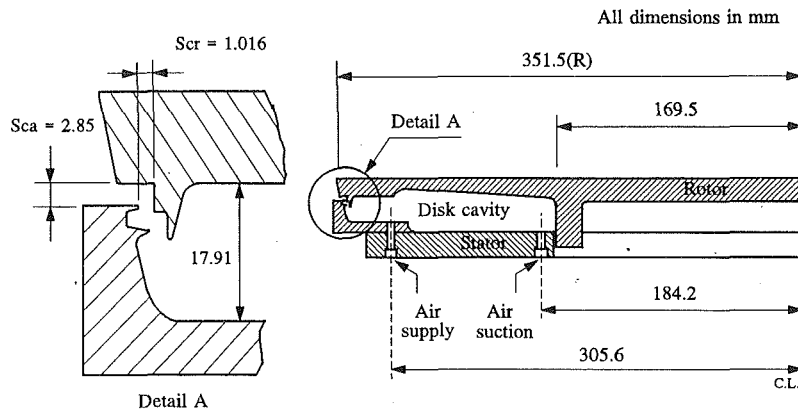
The rotor-stator disk cavity with details of the double-toothed-rim seal
